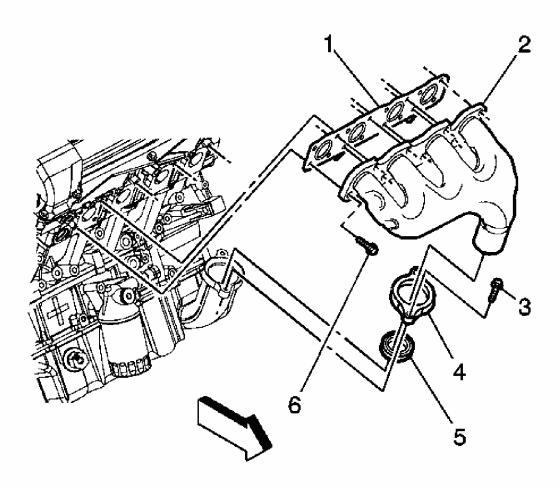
Identifying Left Exhaust Manifold Courtesy of GENERAL MOTORS CORP.
